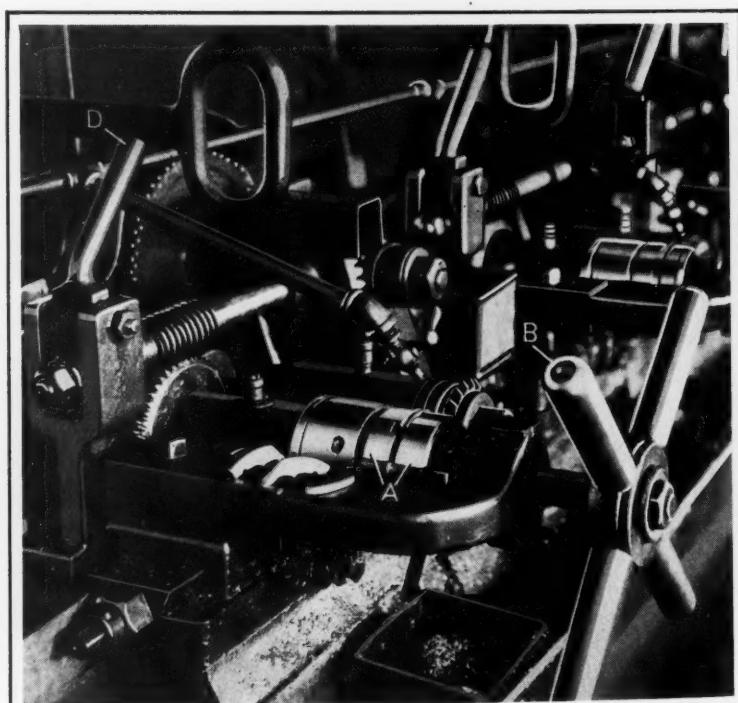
Machine for Milling the Vee in the Tooth. One Man Operates a Battery of Six Machines
